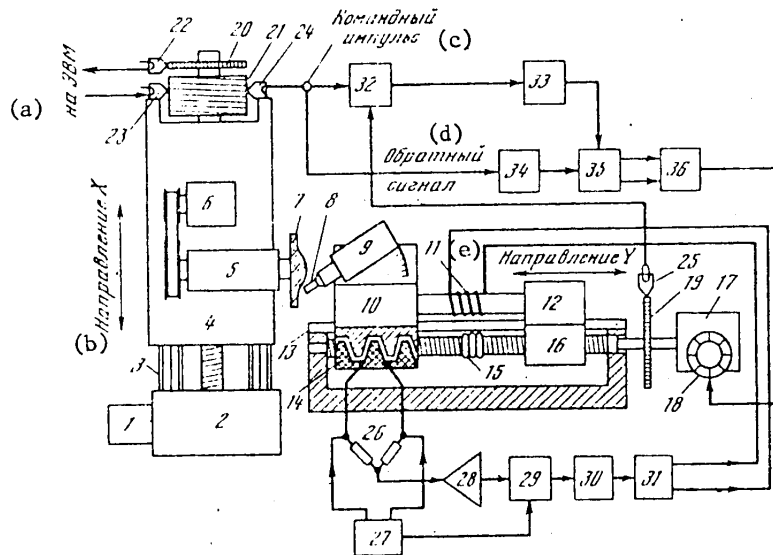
Diagram of the machine tool built by the "Rank Taylor Hobson" Company. 1 -- drive motor for the X-axis; 2 -- reducer; 3 -- V-type guides, 4 -- feed carriage for the X-axis, 5 -- operating spindle, 6 -- operating spindle motor, 7 -- billet, 8 -- tool (drill), 9 -- drive for turning the tool; 10 -- tool feed carriage; 11 -- magnetostrictive converter, 12 -- power part of the feed carriage with respect to the Y-axis; 13 -- roller bearings; 14 -- measuring coupling ("electrostatic nut"); 15 -- bellows coupling; 16 -- drive coupling; 17 -- reducer; 18 -- stepping motor for drive of the Y-axis; 19-21 -- magnetic drums; 22, 24, 25 -- magnetic reading heads, 23 -- magnetic recording head; 26 -- measuring bridge; 27 -- generator; 28 -- amplifier; 29 -- phase discriminator; 30 -- signal processing unit; 31 -- power amplifier; 32 -- bidirectional counter; 33 -- pulse generator; 34 -- counter with preliminary manual setting; 35 -- switch; 36 -- power amplifier.
